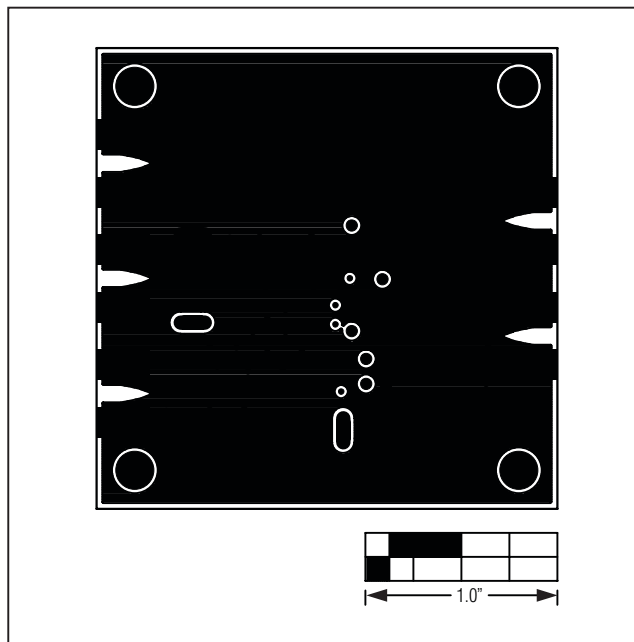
MAX9626 EV Kit PCB Layout—Internal Layer 2 (GND)
